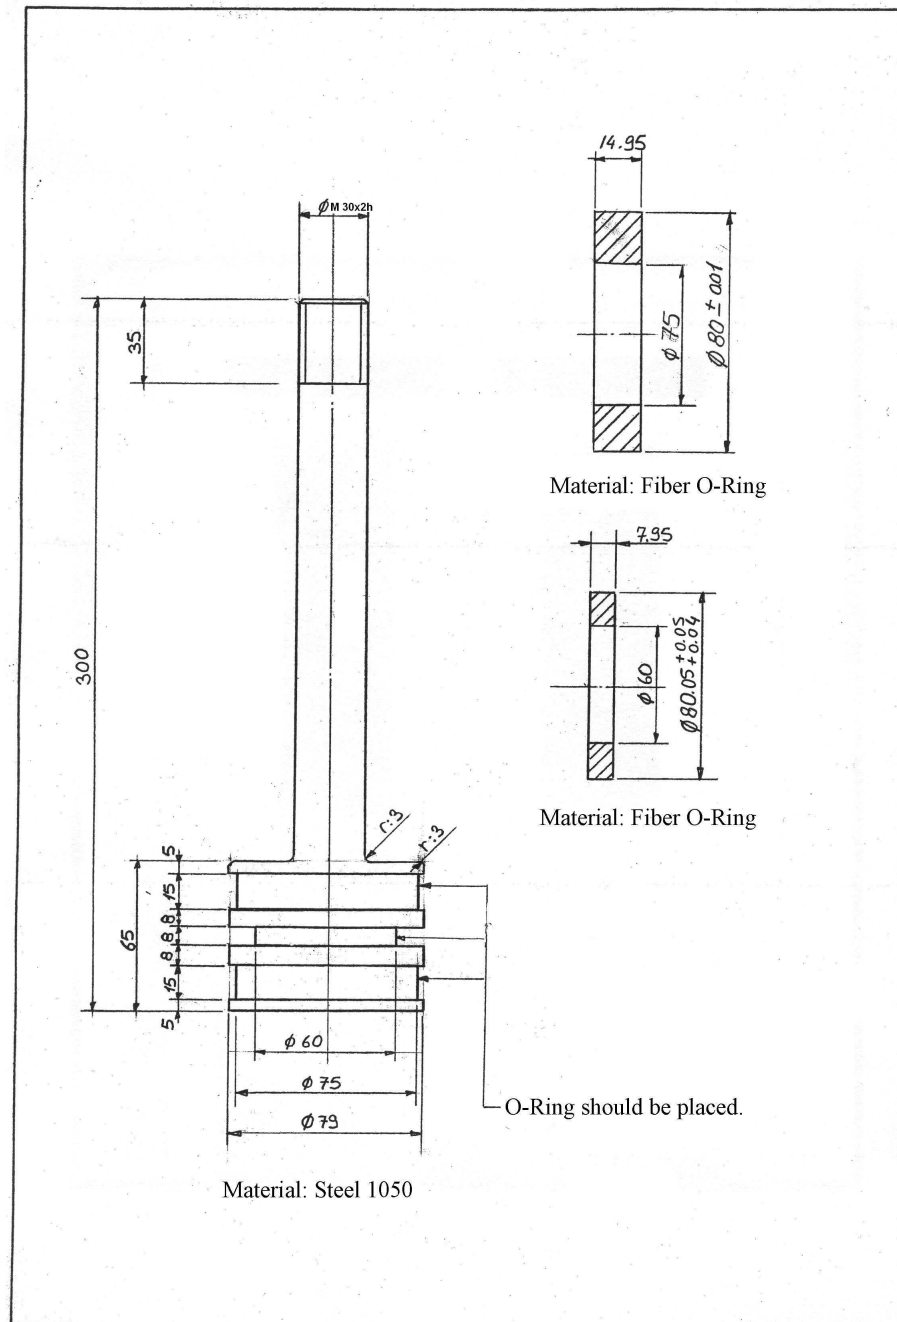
Technical drawing of piston for pressure slip cast set-up
